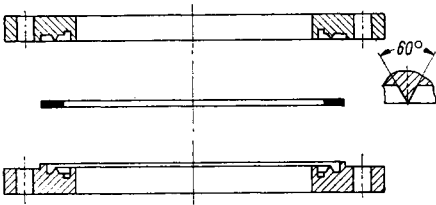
Knife edge seal with flat copper ring gasket.
